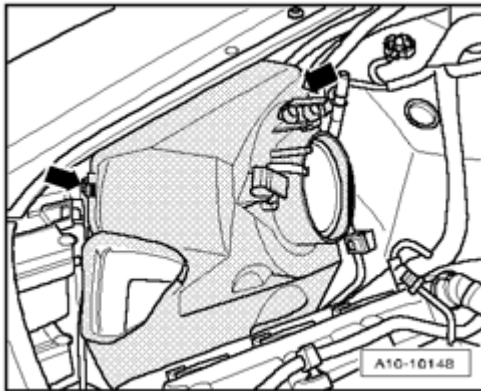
Opening Clips And Removing Upper Part Of Air Filter Housing
